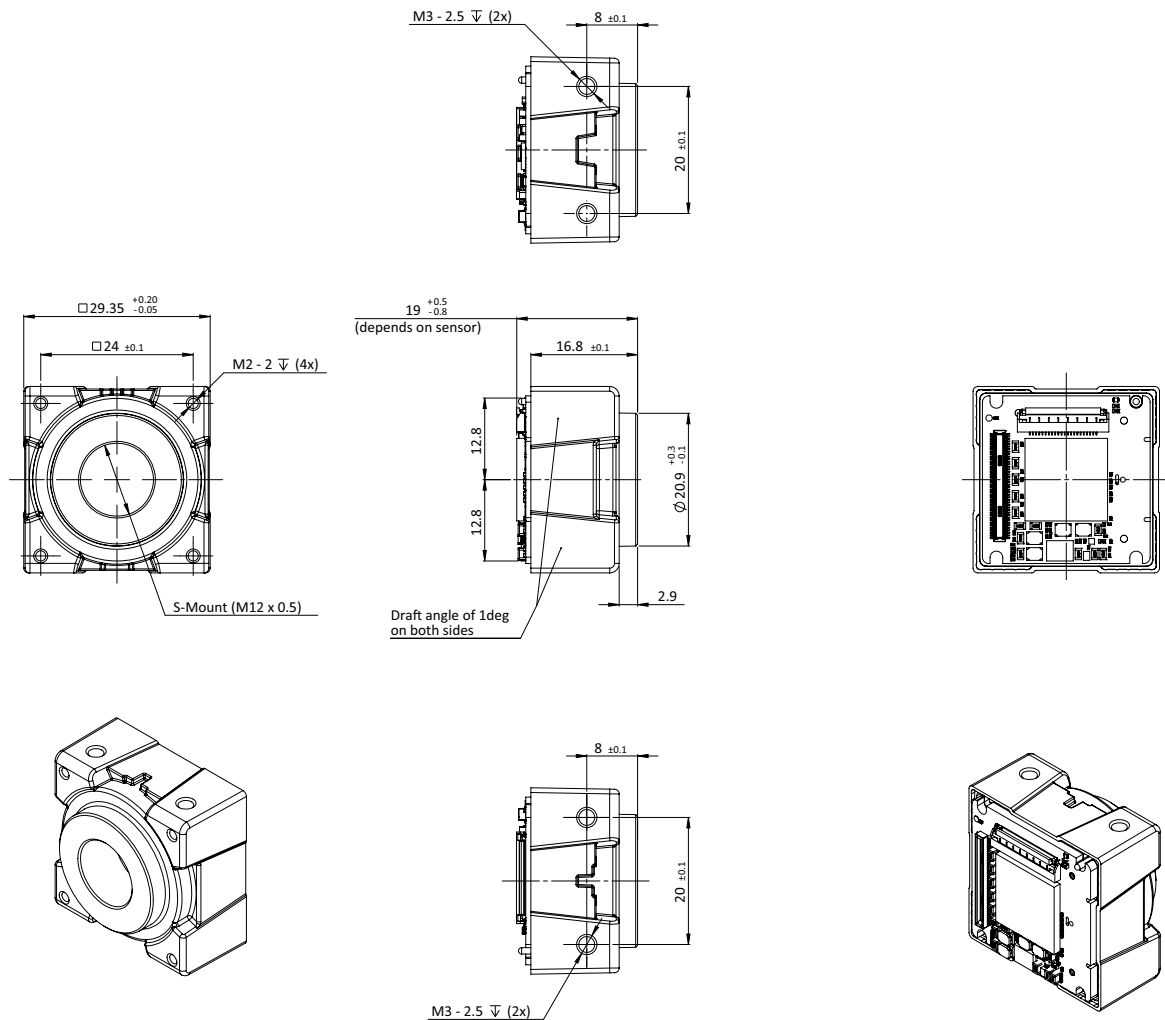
Open Housing S-Mount (standard Alvium) dimensions
